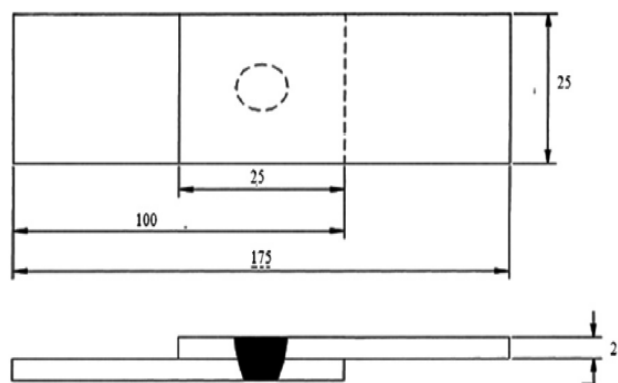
The dimension of spot welded joint (in mm)
